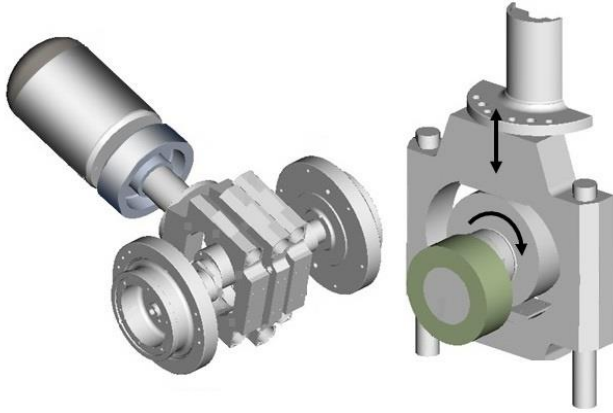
Stirling engine with scotch-yoke drive mechanism [70]
